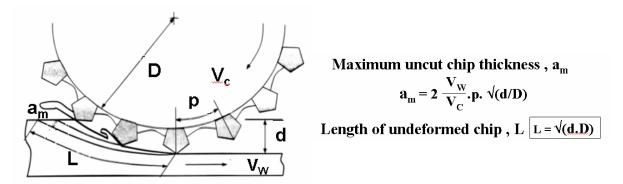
Maximum grit depth of cut and length of undeformed chip
